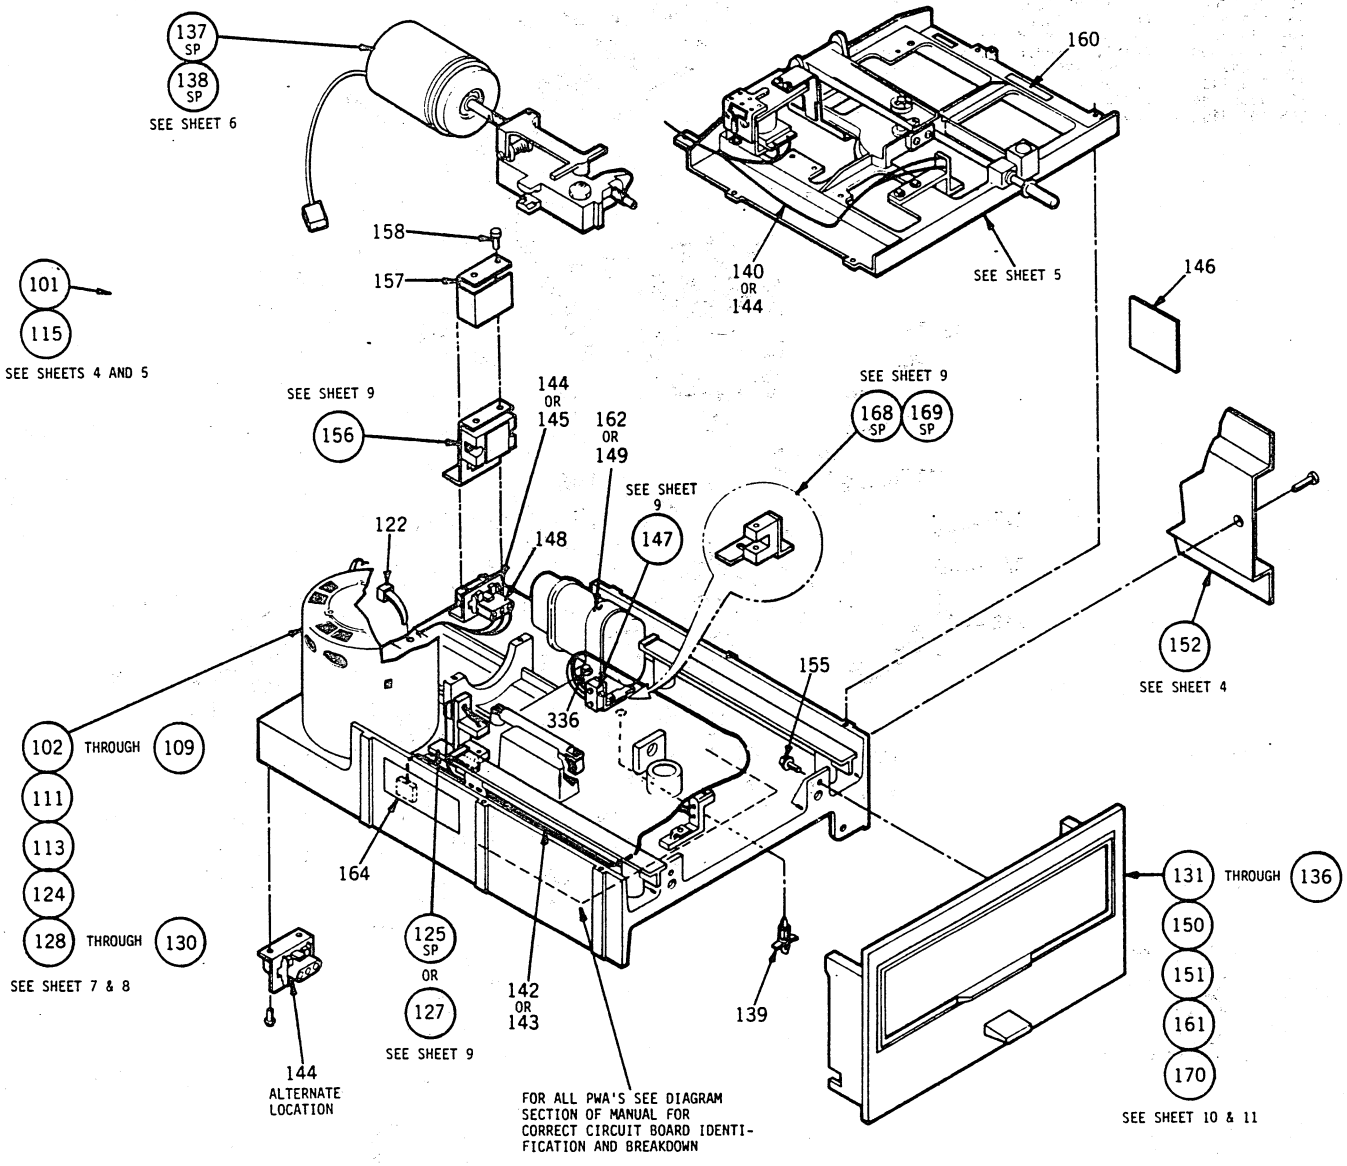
TOP MECHANICAL ASSEMBLY
